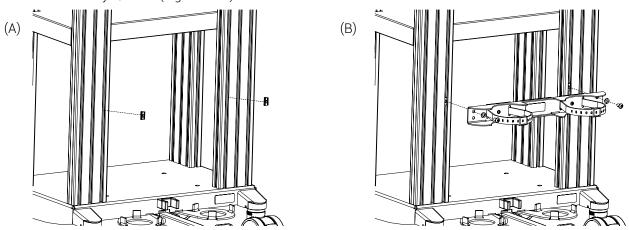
Installation of the top plate of the gas cylinder mounting bracket
